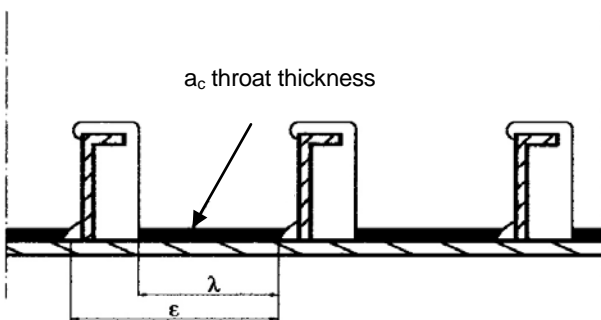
Continuous fillet welding between cut-outs
